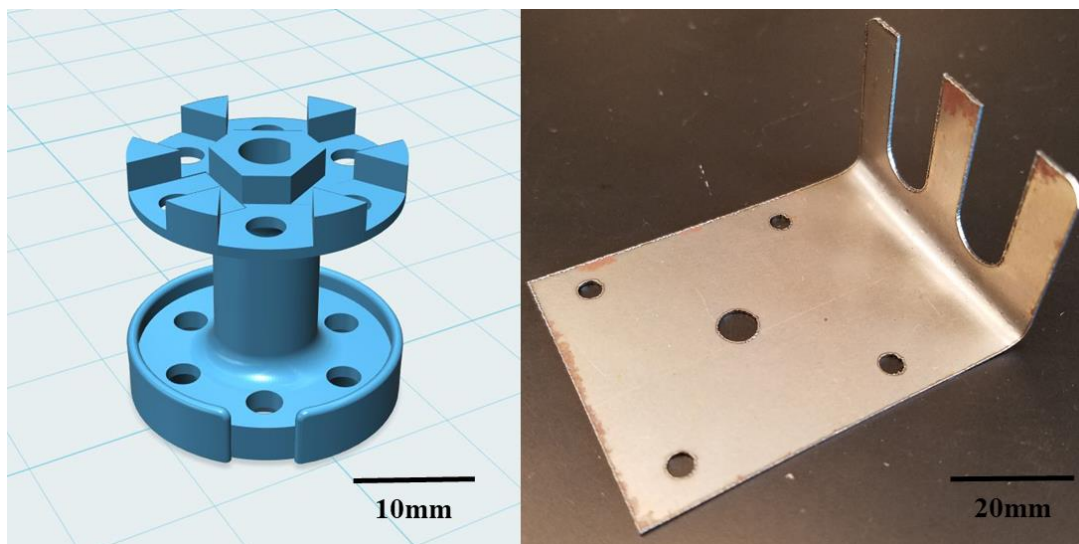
(A) AutoCAD sketch of the fluid pumphead attachment for stepper motors. There are six posts to allow for the least amount of pressure drop-off between the posts when turning. (B) Example of laser cut motor bracket after bending.
